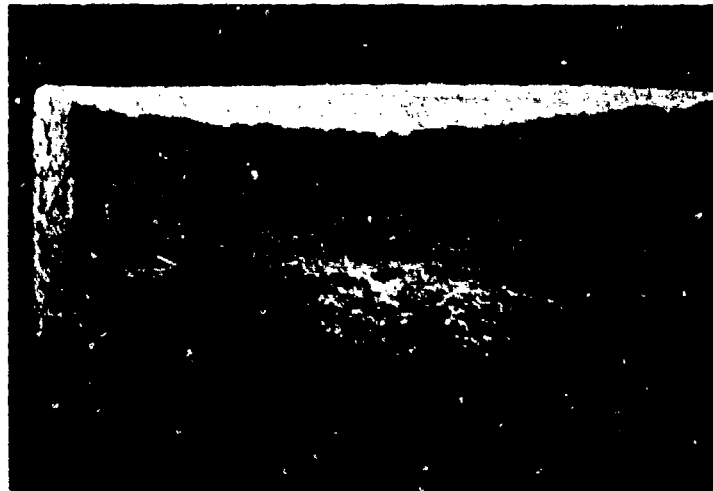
Tensile fracture surface of an A-242 longitudinal specimen, 12x.
